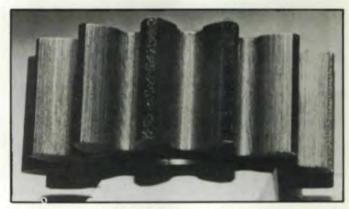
Shaper-cut finish of left-hand gear in Fig. 8 as produced with the cutter making 121 strokes per minute and feeding at a rate of 0.001-in. per stroke.
